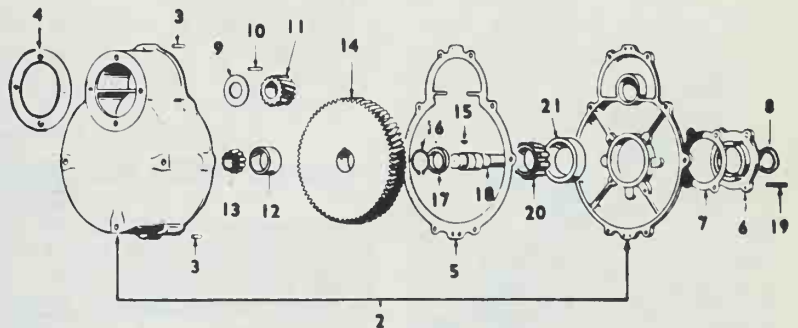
Exploded view of typical reduction gear set. See text for service details.
